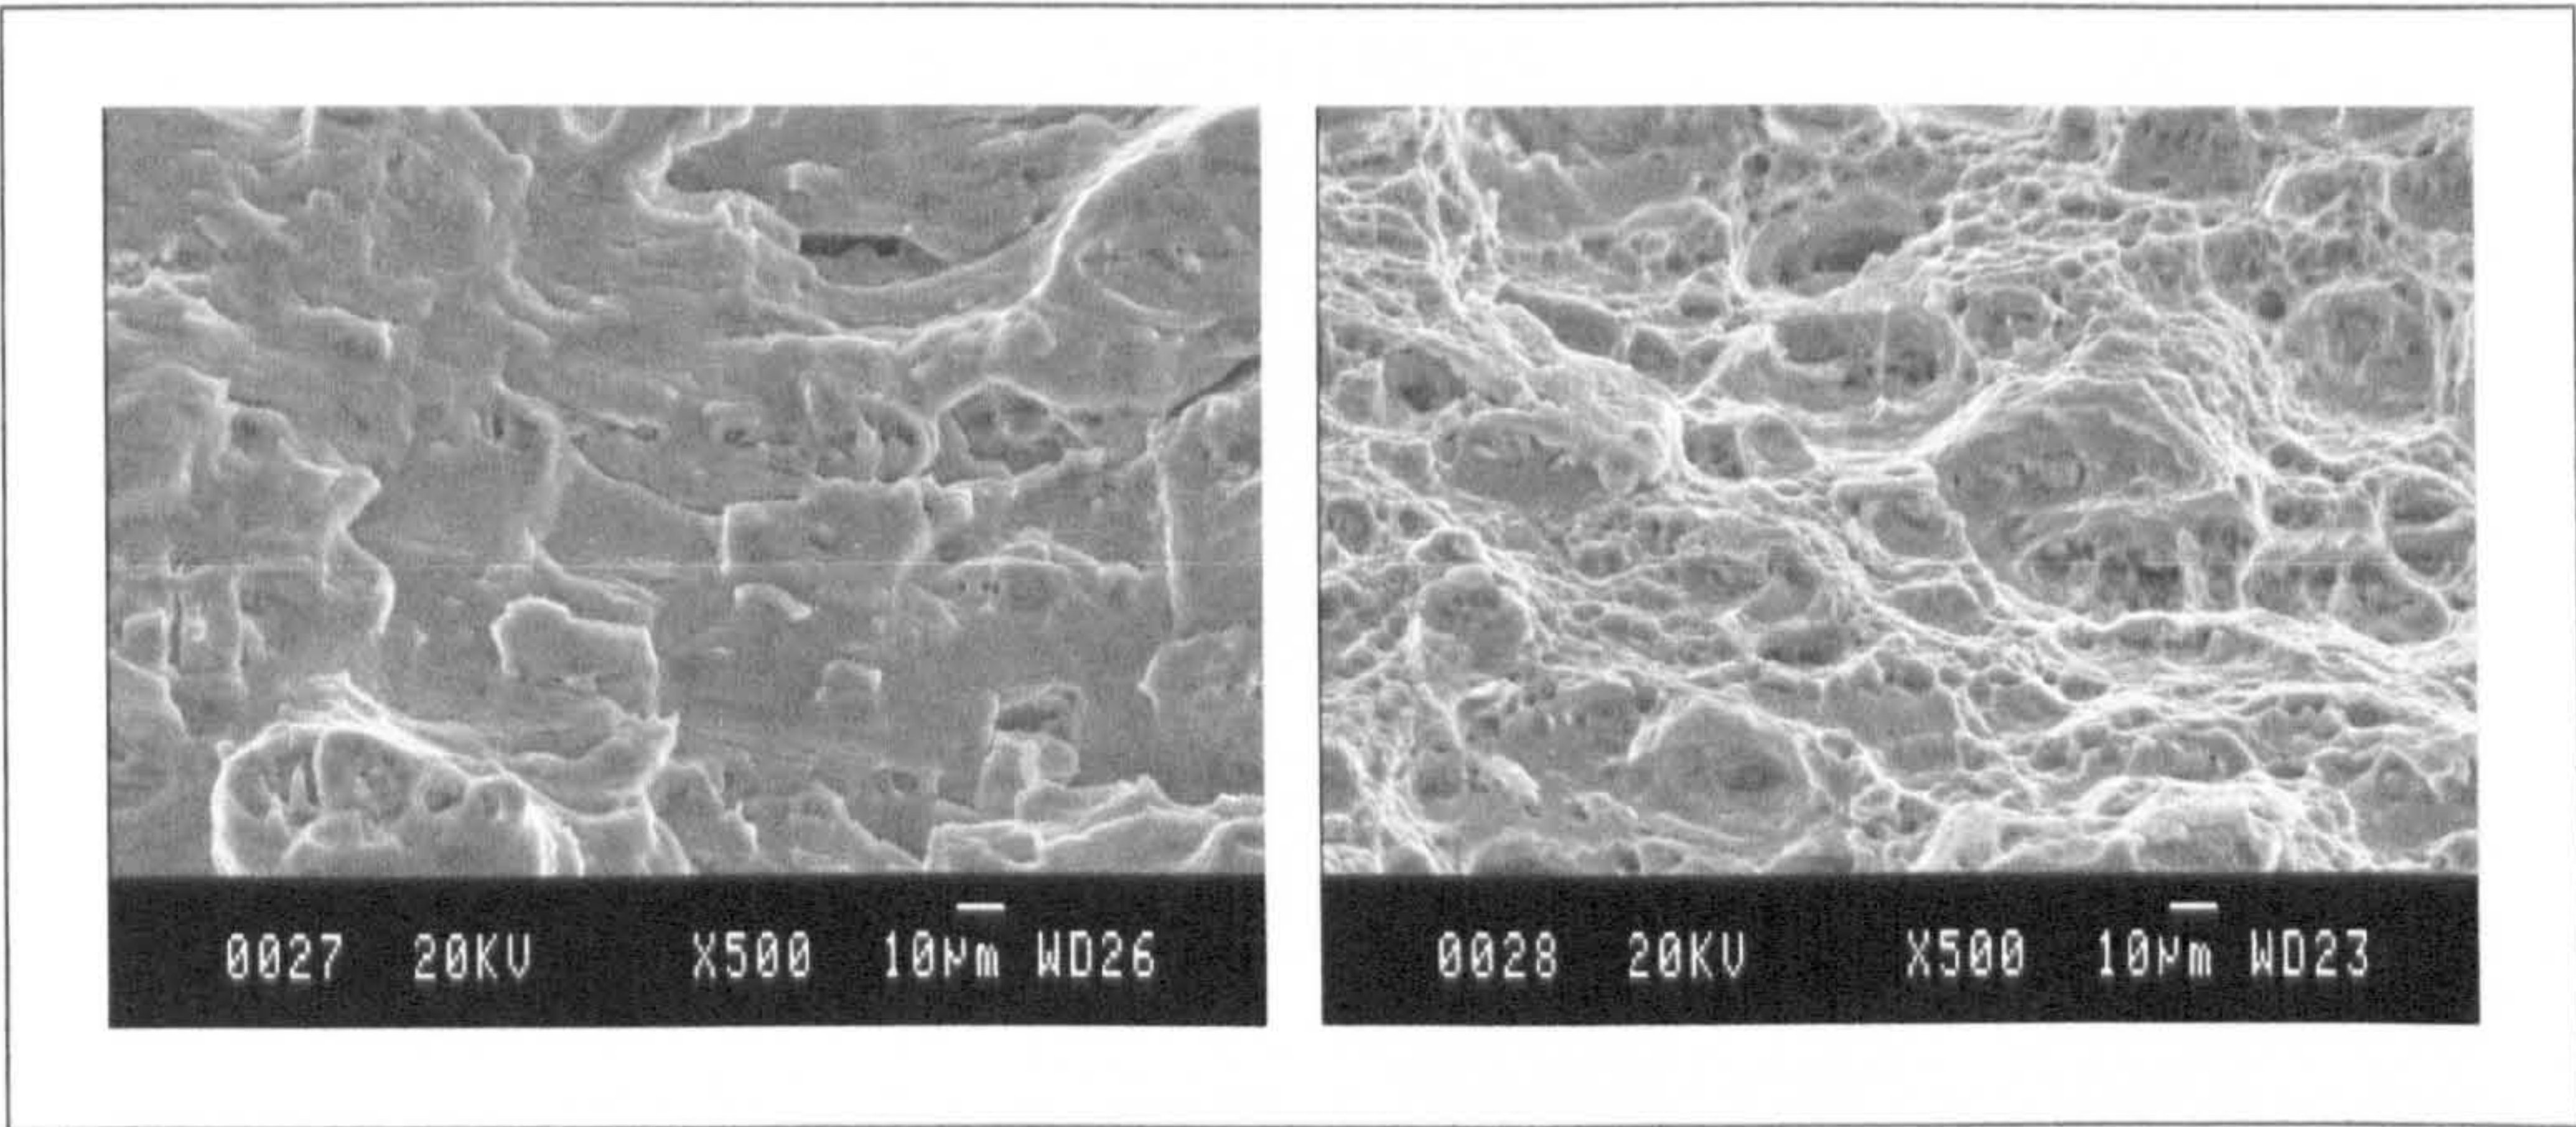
Fatigue fracture surface showing striations and secondary cracking (left), microvoid coalescence on the fast fracture surface (right) (MIG LI 1).
